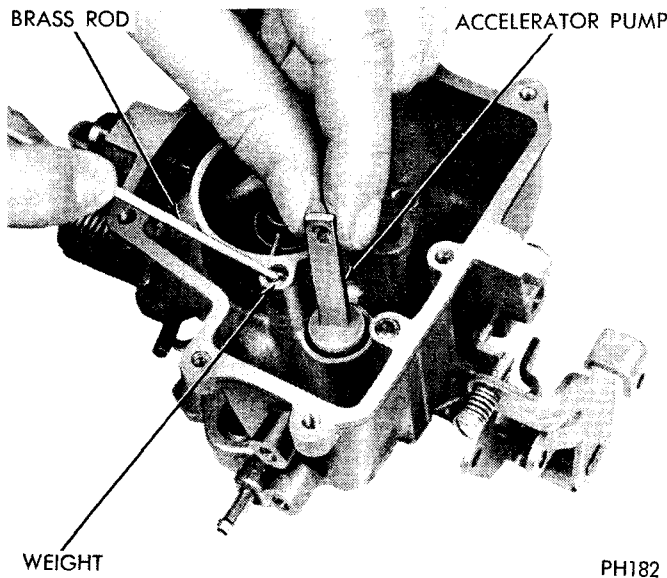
Testing Accelerator Pump Discharge Check Ball and Seat
